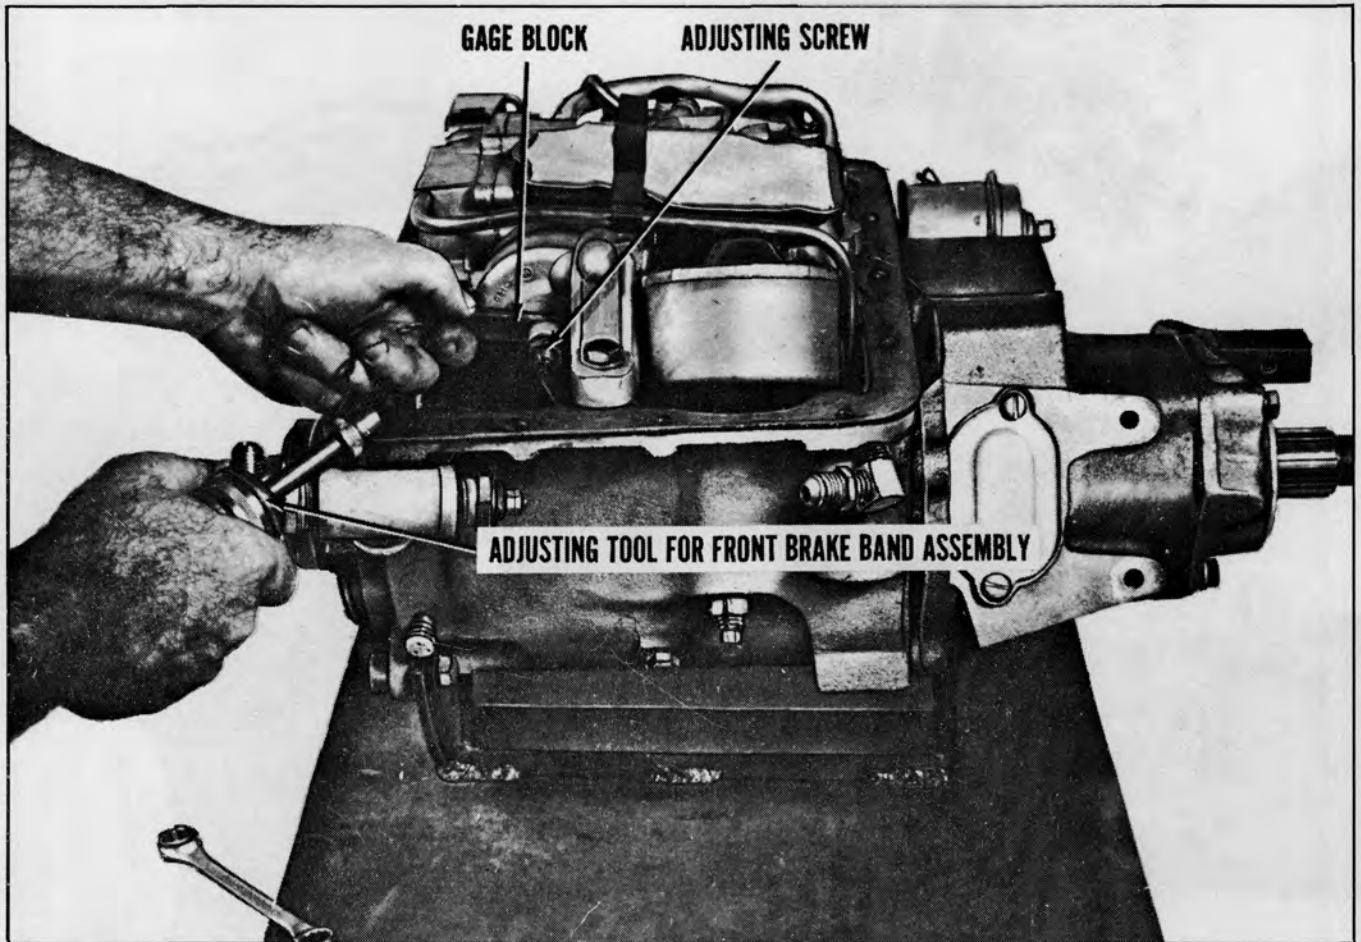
Pull Back On Adjusting Rod and Insert Gauge Block
